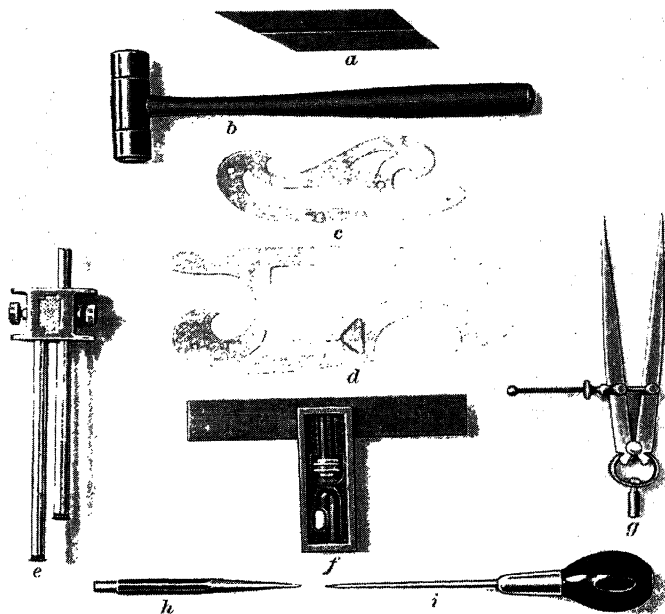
Laying-out tools: (a) miter blade, (b) soft-face hammer
